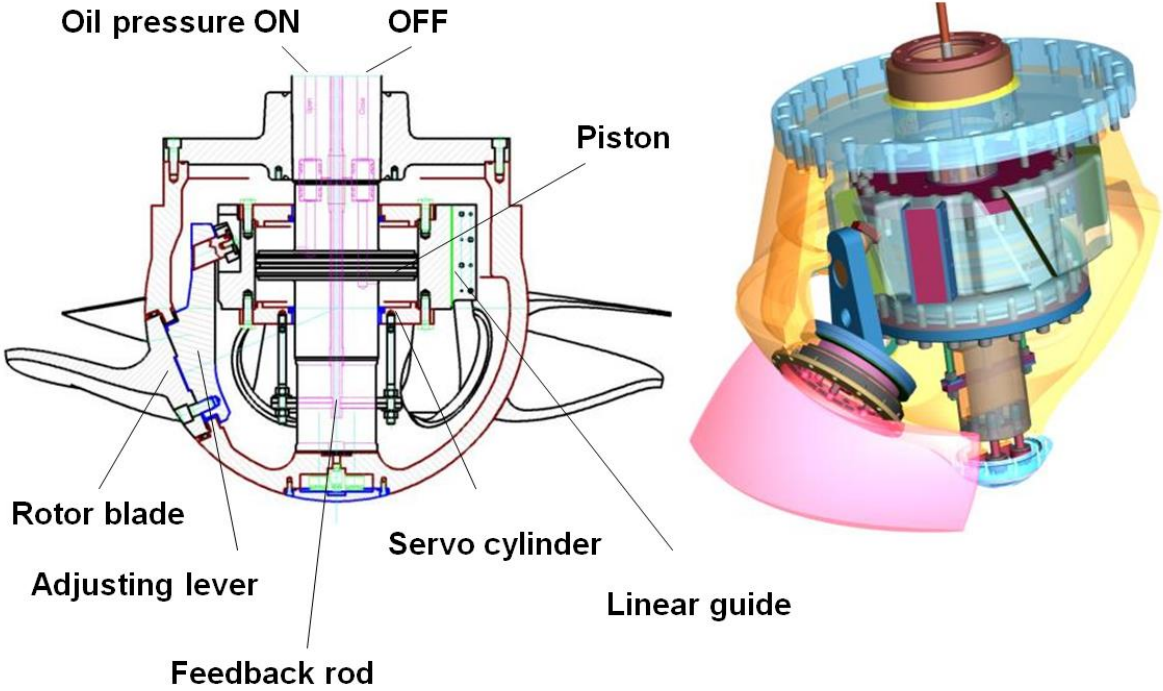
Impeller adjustment with piston (Andritz, internal source)
